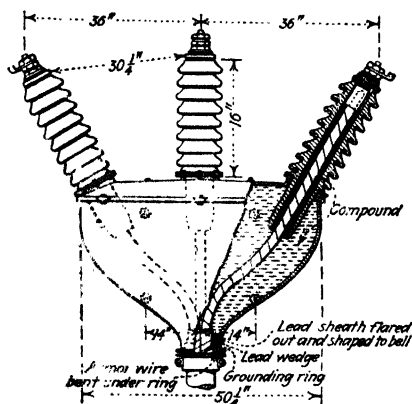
Pothead assembly for 44,000-volt submarine cable.
